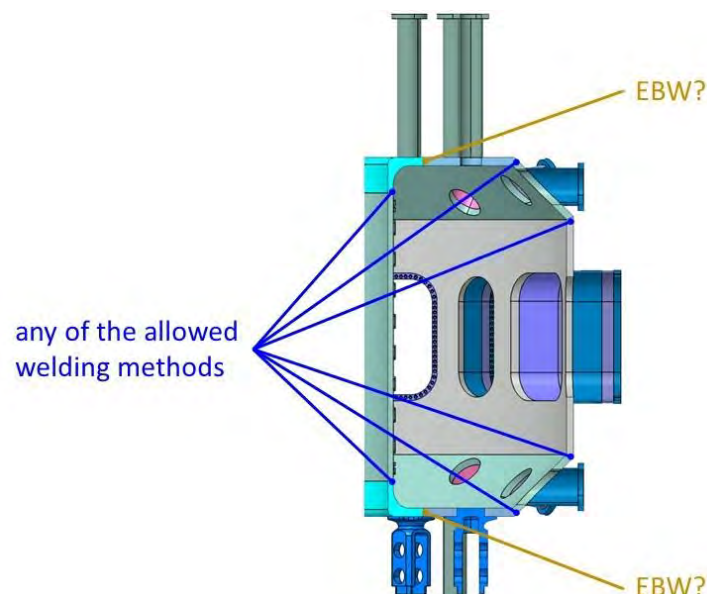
Welding methods preferred to be used for welding of the VV assembly
